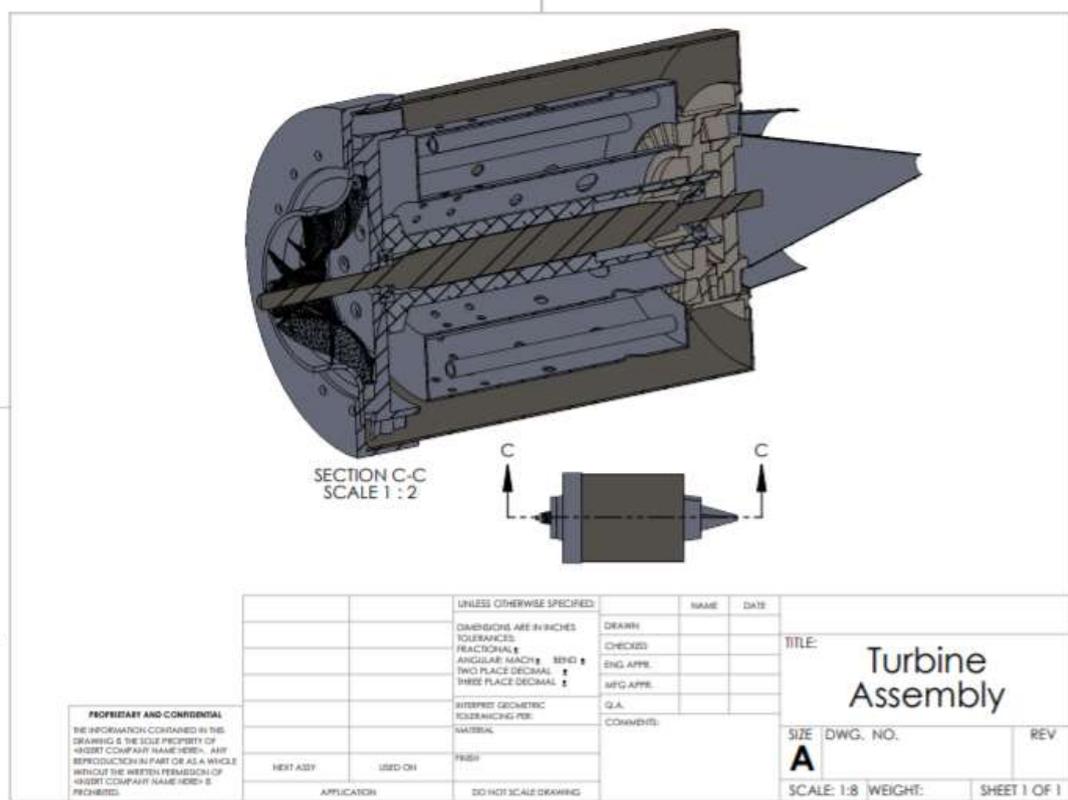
Turbine Assembly for Miniature Axial Jet Engine.
